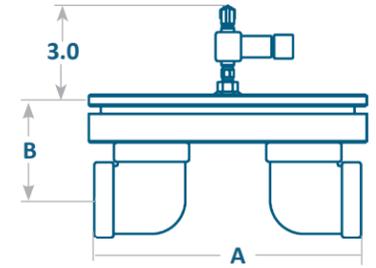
Dimensional Drawing for Regulators with line size 1.5" to 4"
